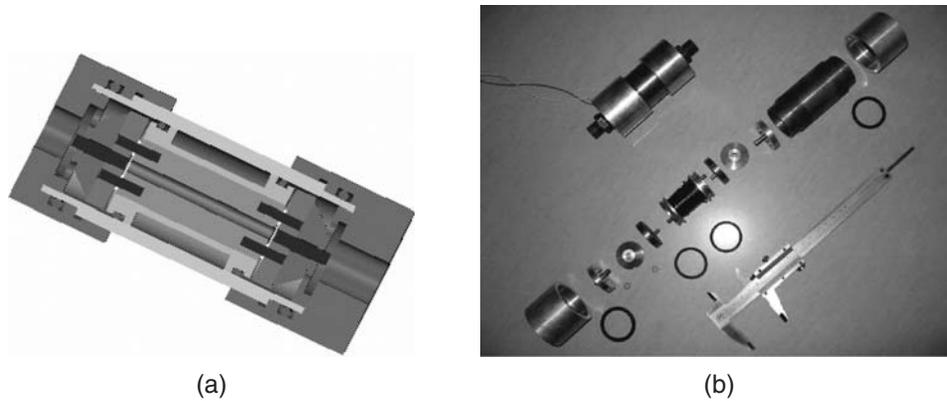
An MR valve with annular and circular disk-type fluid flow resistance gaps simultaneously: (a) drawing and (b) exploded photo.
